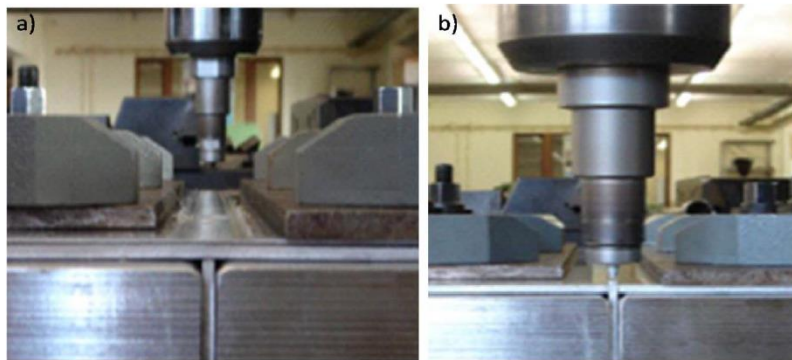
FSW T-joints: a) T-butt joint; b) T-lap joint.
